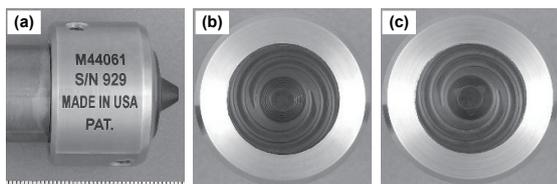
Appearance of PCBN tool; (a) side view, (b) spiral probe and (c) 3 sides chamfer probe.
